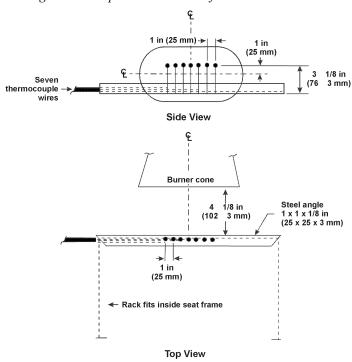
Top and Side Views of Thermocouple Rack Bracket
